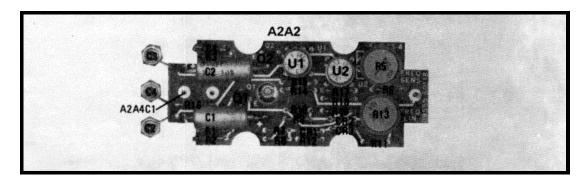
500 MHz LO Drive Assembly A2A2
